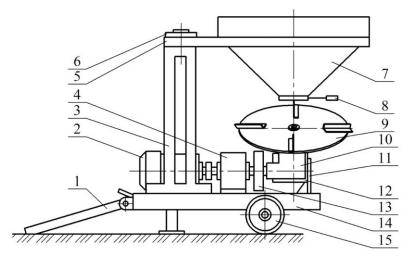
Scheme of the experimental device: 1 – handle; 2 – electric motor; 3, 5 – movable and turning frames; 4 – chain variator; 6 – hinge for turning the frame; 7 – tank; 8 – flap; 9 – inclined working tool; 10 – conical reductor; 11, 12 – supports; 13 – overrunning clutch; 14 – basic frame; 15 – support wheel
